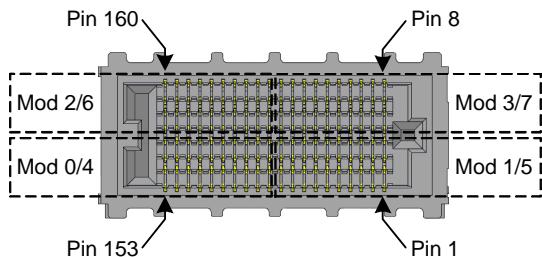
160-Pin Samtec SEAF8-20-1-S-08-2-RA Connector – Front View
